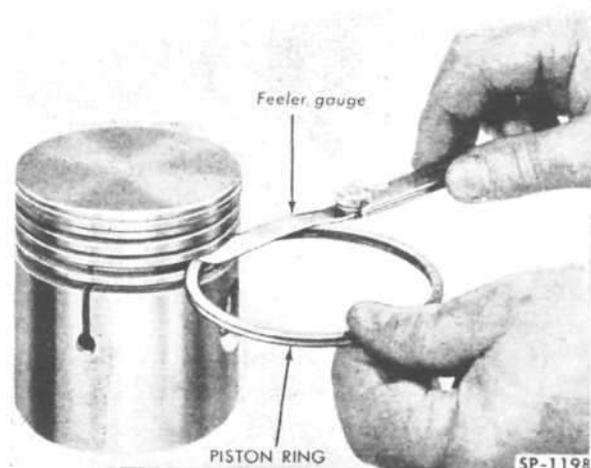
CHECKING PISTON RING SIDE CLEARANCE
